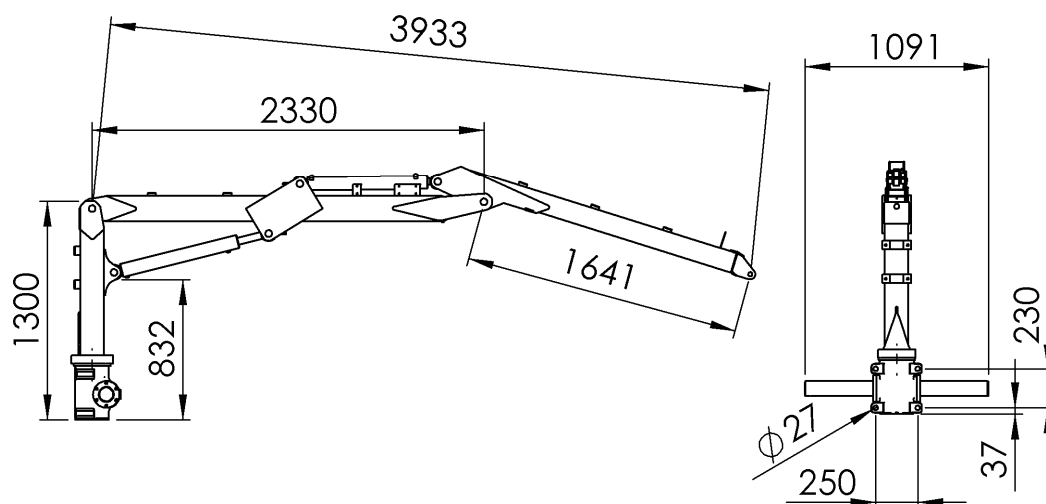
Forest crane FARMI 2740 dimensions (mm)
